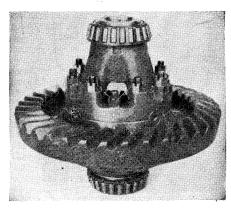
If original identification marks are not clear, mark differential case halves with a punch before disassembling for correct alignment when reassembling
